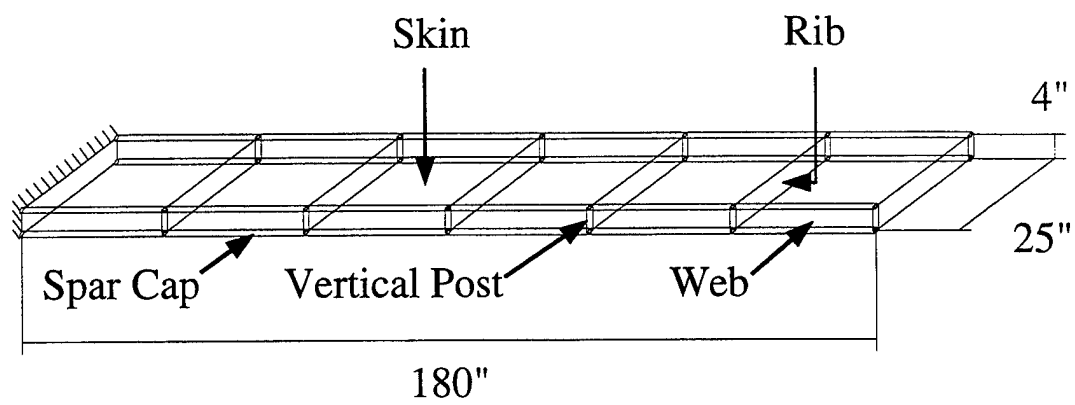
Dimensions and member identification of the built-up aluminum wing box.
